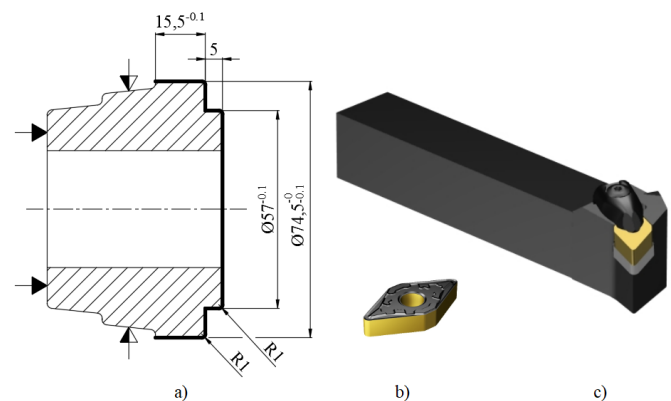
(a) Third pass, (b) Indexable insert, and (c) Shank tool
